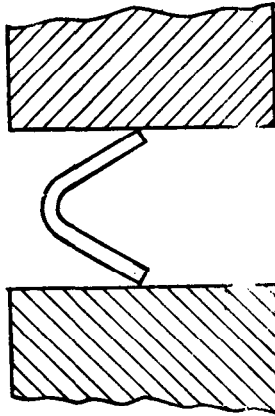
BEND TEST THROUGH A SPECIFIED ANGLE
